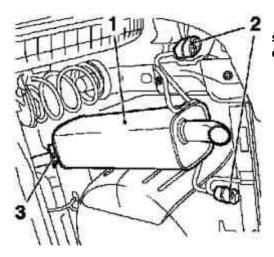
Terminal silencer: 1 - silencer, 2 - rubber bearing 3 - clamp
